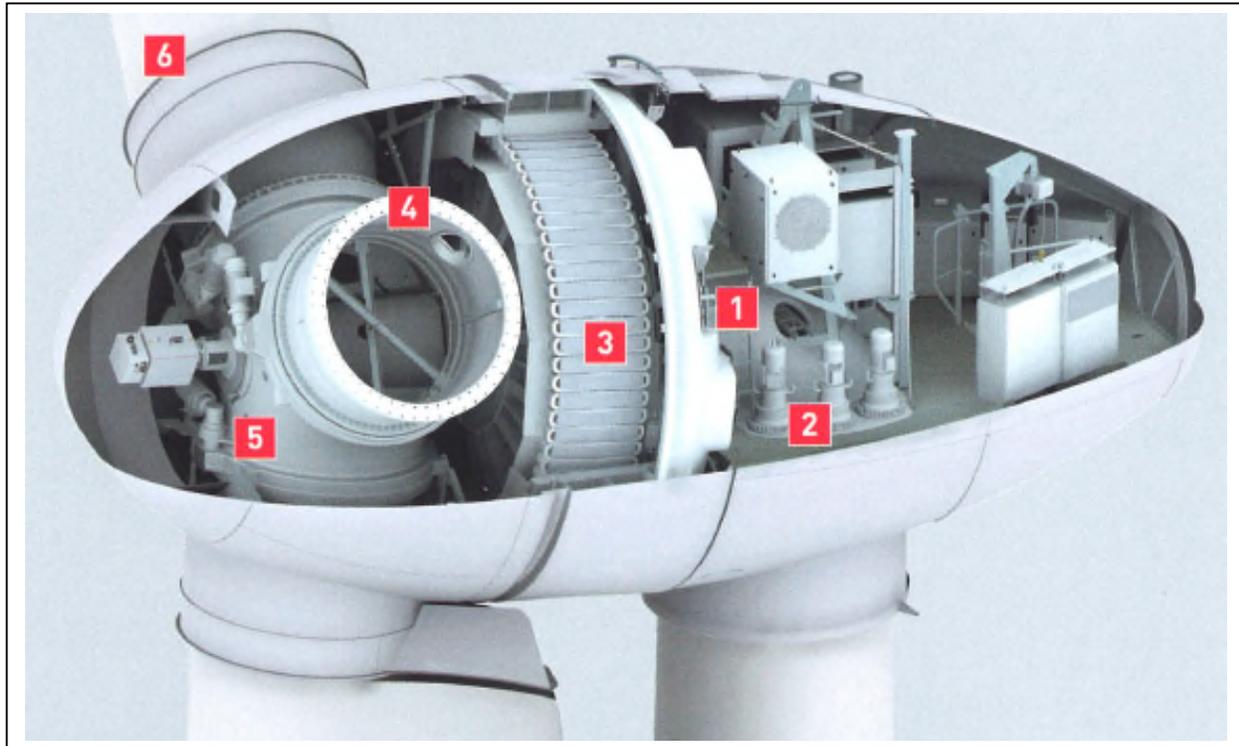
Detailed structure of a typical gearless nacelle of a wind turbine. The following components are illustrated 1) main carrier, 2) yaw drive, 3) annular generator, 4) blade adapter, 5) rotor hub and 6) rotor blade (Enercon Product Overview, March 2014)
